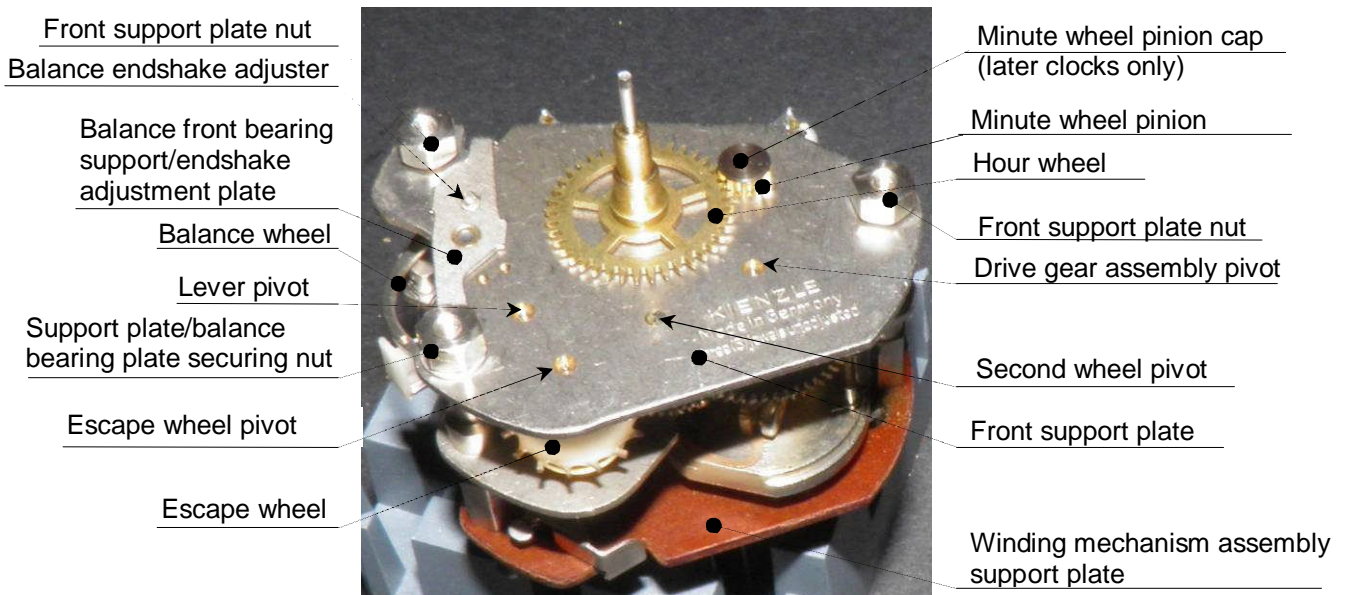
Photograph of clock mechanism removed from case and dial assembly. Note there is a thin dished brass thrust washer (not shown here) between the hour wheel and the dial. *Fig. 1.11* shows this thrust washer.
